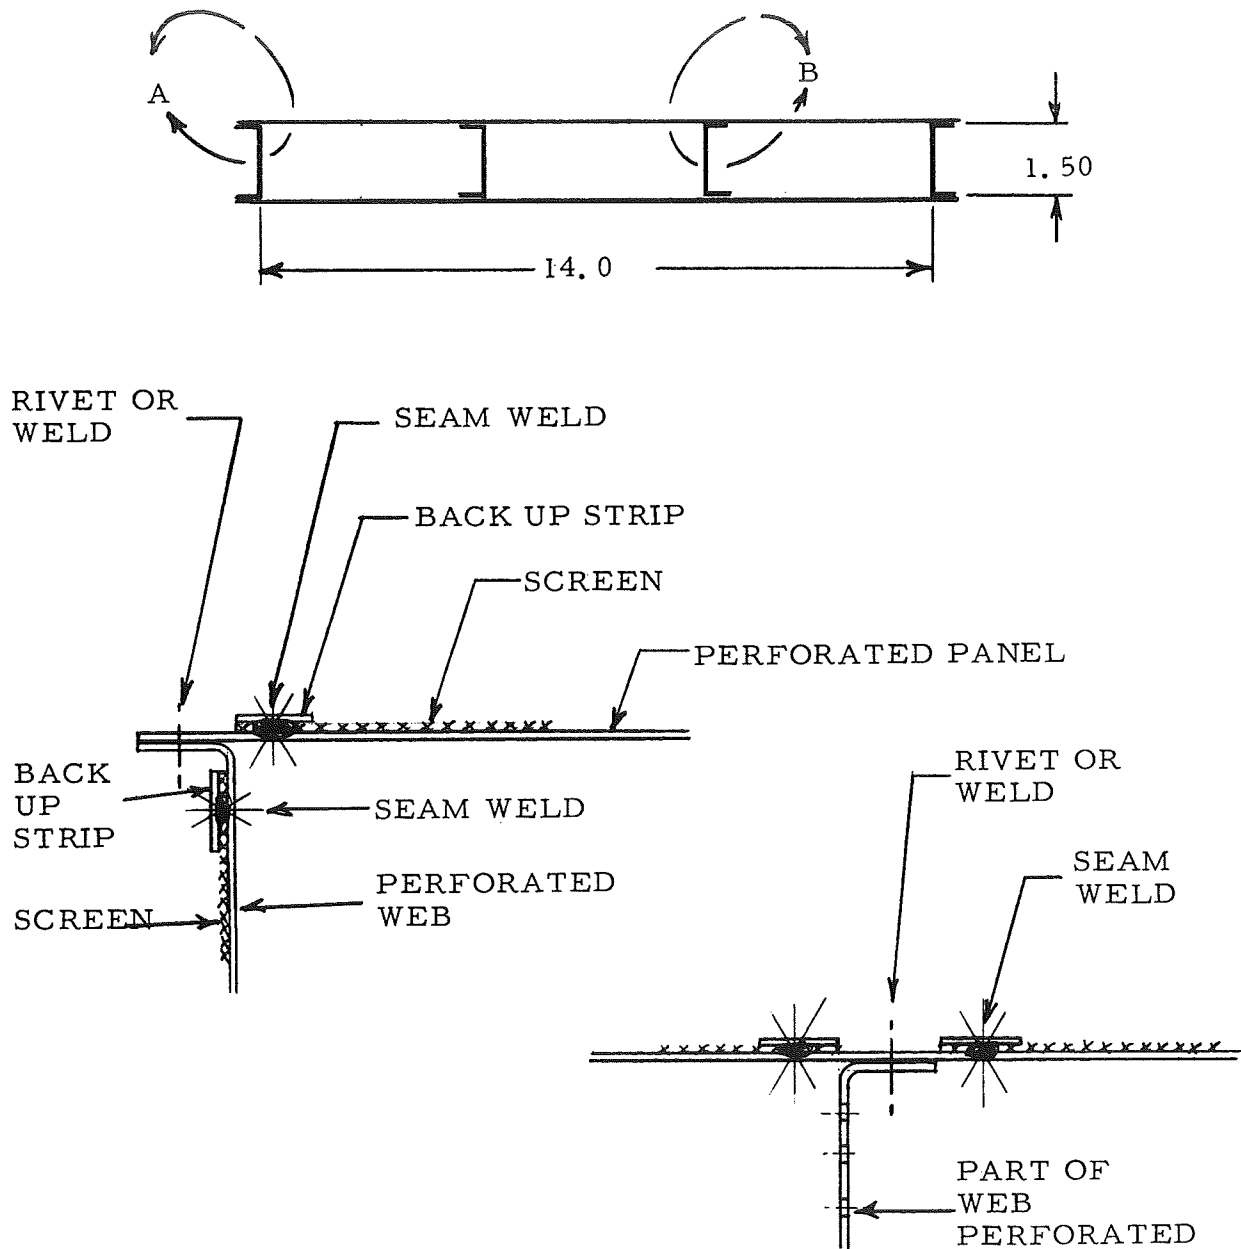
Oxidizer Tanker Collector Alternate Structural Arrangement.
